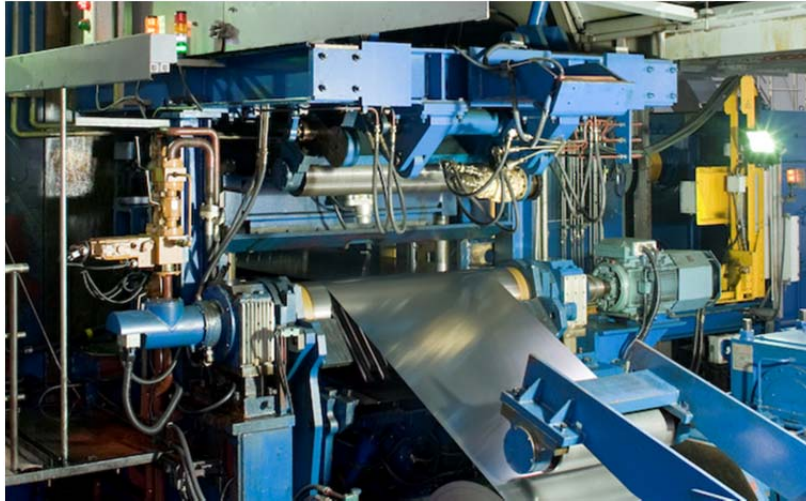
Installation of X-Shape measurement roll in the entry section of a reversing cold mill.
